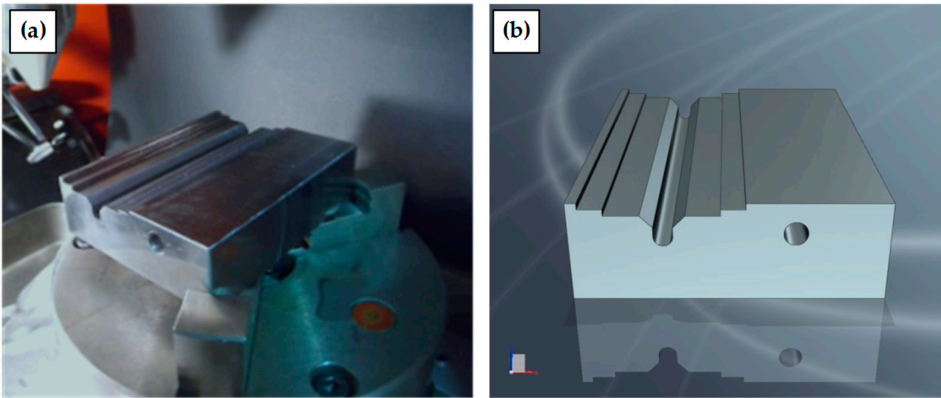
(a) Resulting part; (b) CAD model to be processed.
